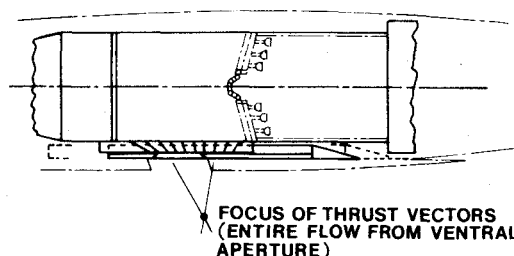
Slide-valve nozzle, with flat slider, for a turbofan engine augmented in the cruise mode only.
